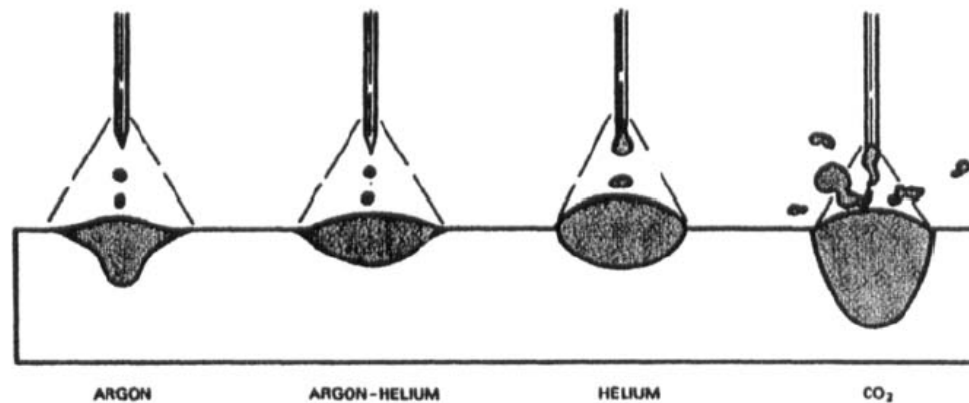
Effect of shielding gas composition on type of molten metal transfer, weld bead contour, and weld penetration. (From *Welding Handbook*, Vol. 2: *Processes*, 8th ed., edited by R. L. O'Brien, published in 1991 by and used with permission of the American Welding Society, Miami, FL.)
